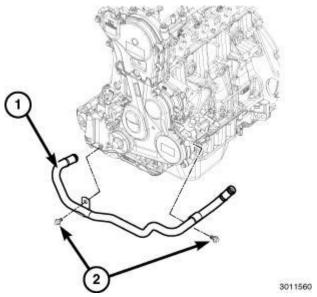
Coolant Tube & Bolts Courtesy of CHRYSLER LLC
